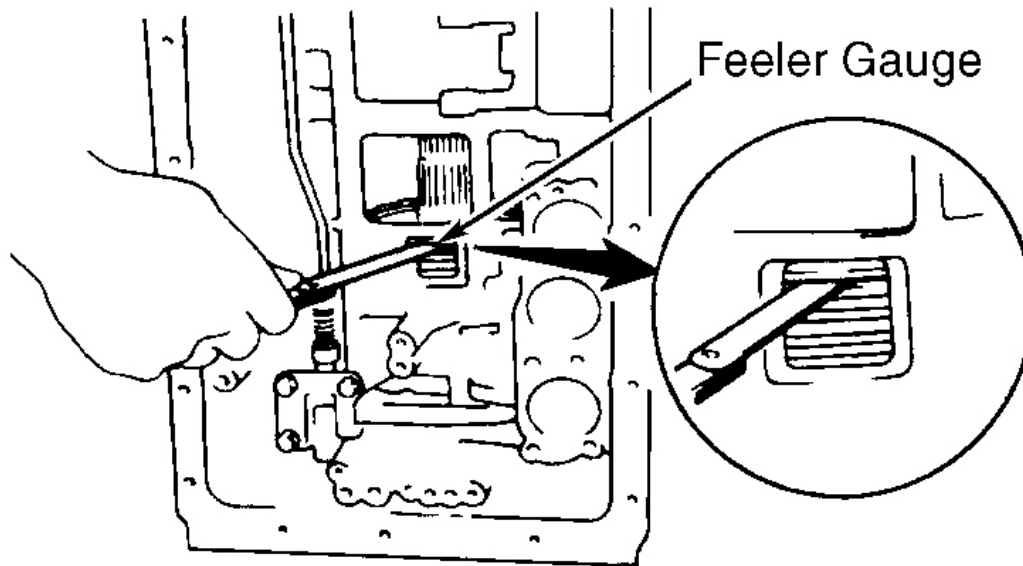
Measuring 2nd Coast Brake Piston Stroke (Measuring Clearance)
